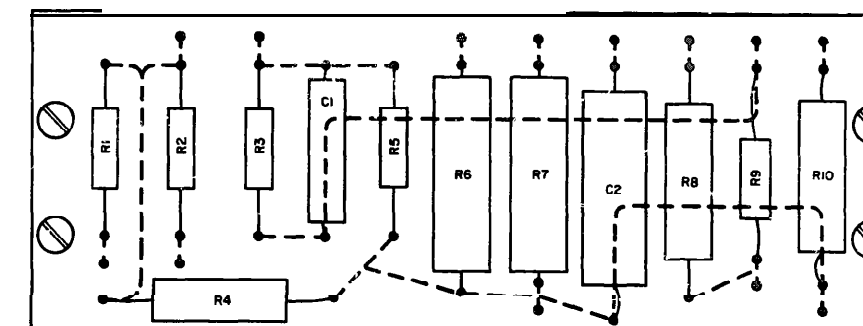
686A power supply printed circuit board assembly A1, wiring diagram and parts location
